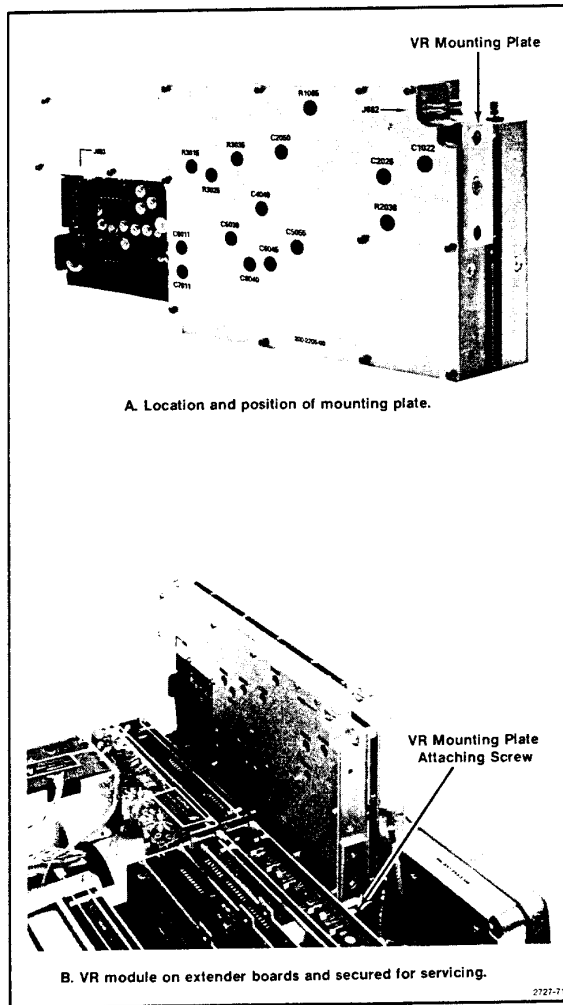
Preparing the VR module for service showing how it is supported when on an extender.
